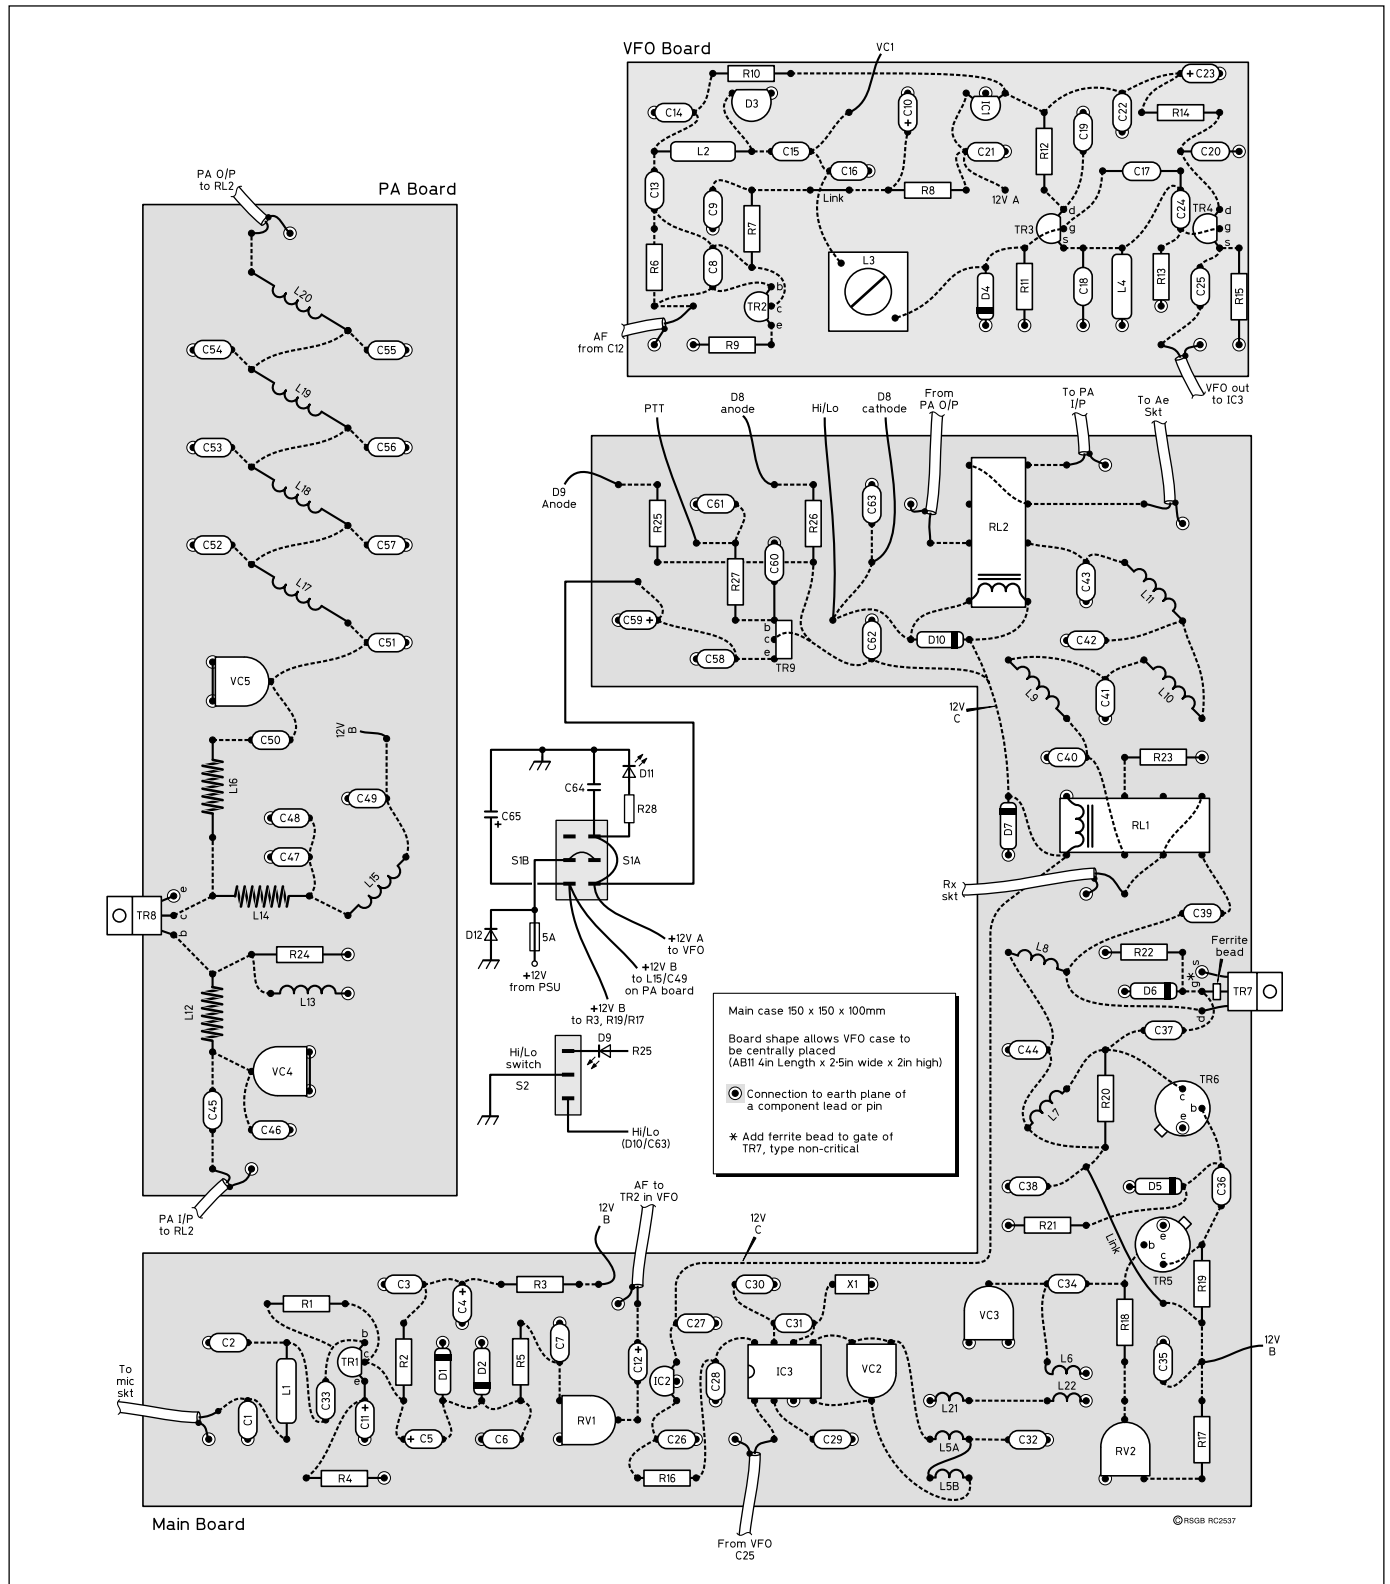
Physical layout. The top layer of the boards is a solid copper ground plane. Drill through, countersink the holes, and wire point-to-point underneath. Alternatively, design your own PCB.
